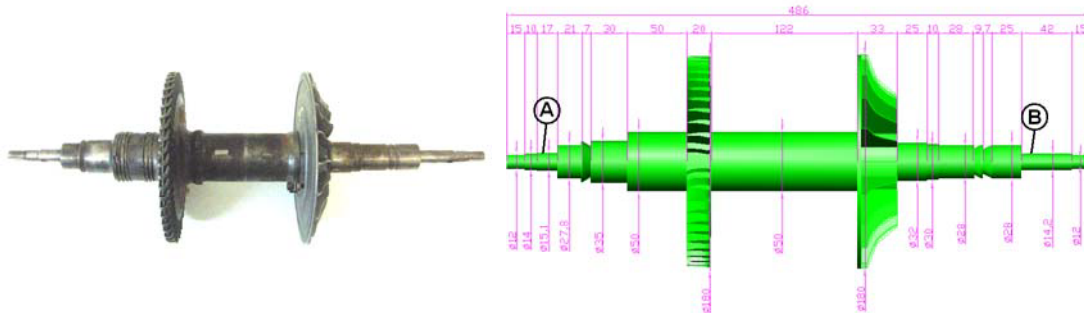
The selected shaft, its dimensions and seating positions (A, B)
